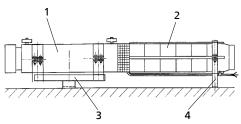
Mounting the pump set on support frame and pedestal (example)
